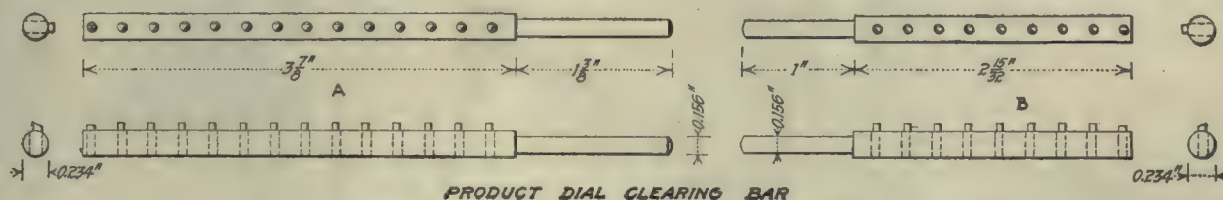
DETAILS OF CLEARING BARS AND PINS
